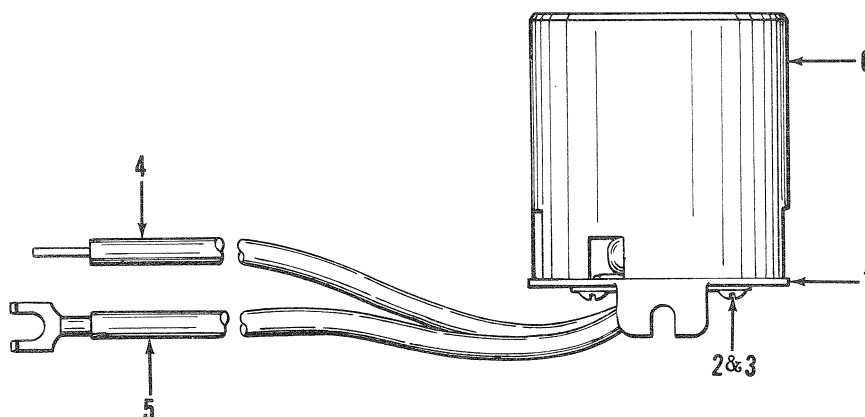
SOCKET ASSEMBLY - PROJECTION LAMP
